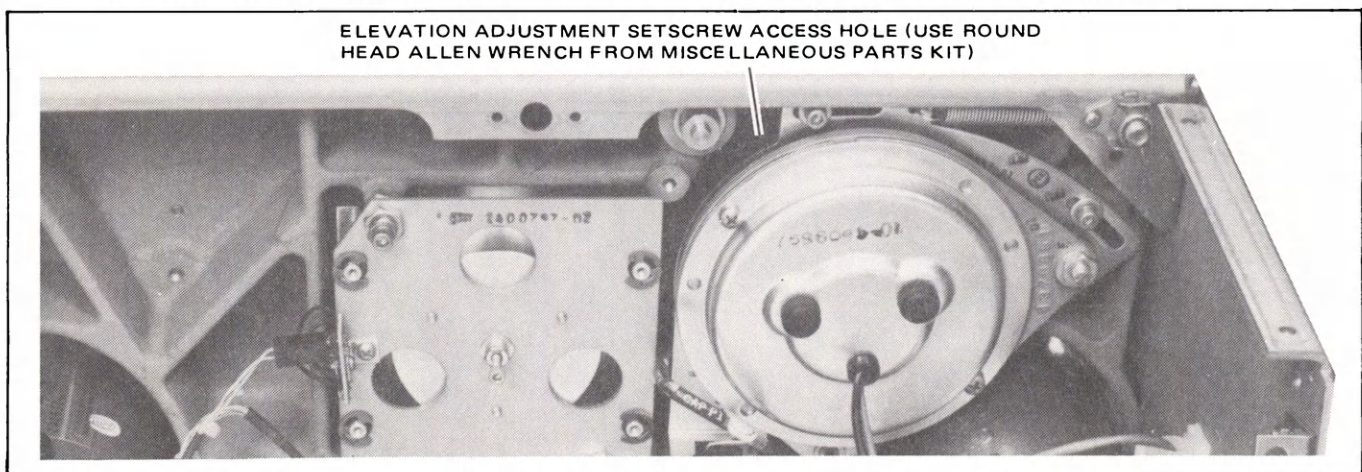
Idler Assembly Hub Elevation Adjustment
